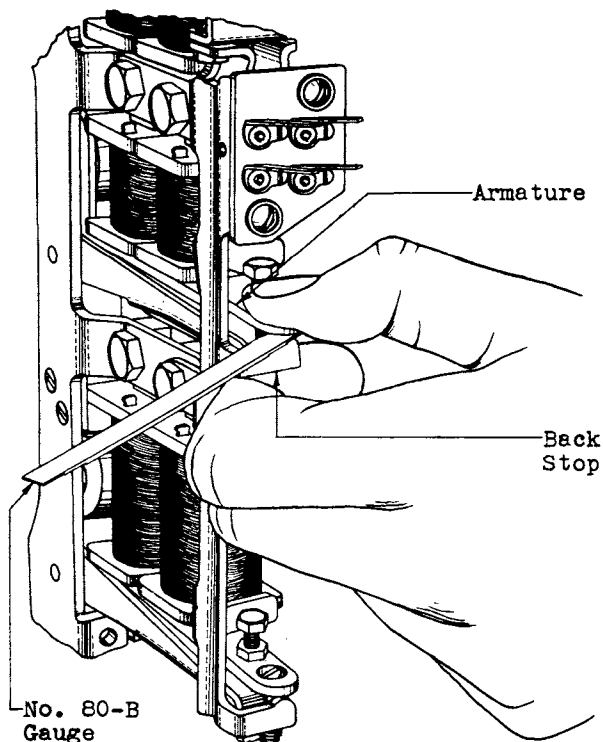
Method of Holding Gauge to Check Pawl Engagement
